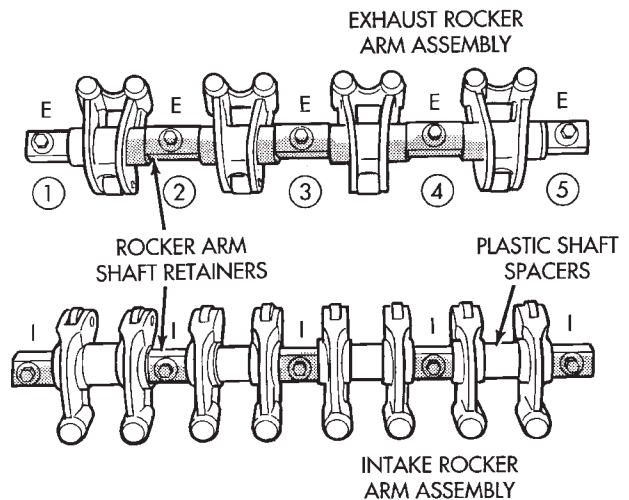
Rocker Arm Shaft Tightening Sequence
